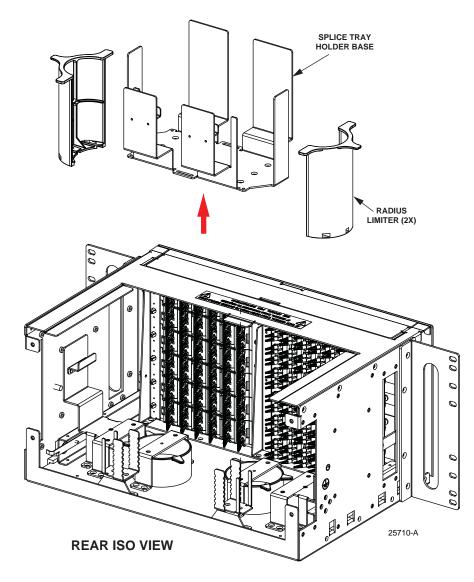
Removing Splice Tray Holder Base and Radius Limiters (5RU Panel Rear View)
